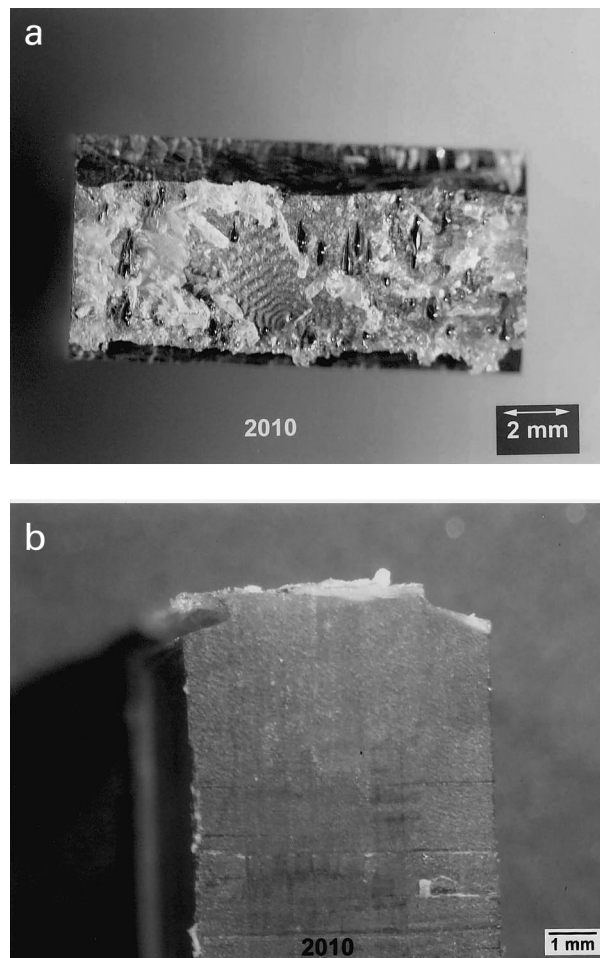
Fracture surfaces of 6.2-mm-thick PEI specimens for hot-tool weld made at  $T_H = 455^\circ\text{C}$ , a heating time of 20 s, melt and weld penetrations of 0.13 and 0.91 mm, respectively, and a seal time of 10 s. (a) Top view, and (b) side view.
